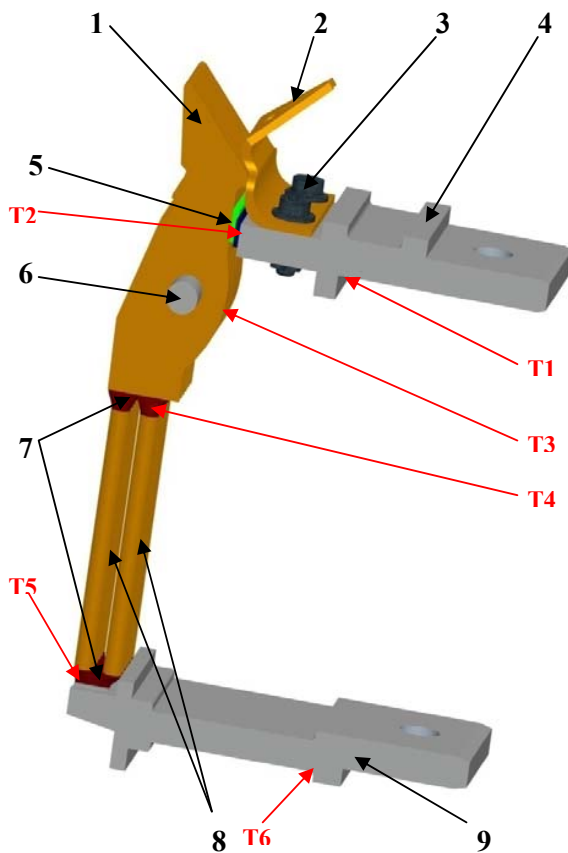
Current path thermal model (1 – breaking movable contact; 2 – breaking fixed contact; 3 – screw; 4 - top current path; 5 – electric contact; 6 – shaft; 7 – joining pieces; 8 - flexible current path; 9 – bottom current path) and the temperature measurement points (T1...T6)
